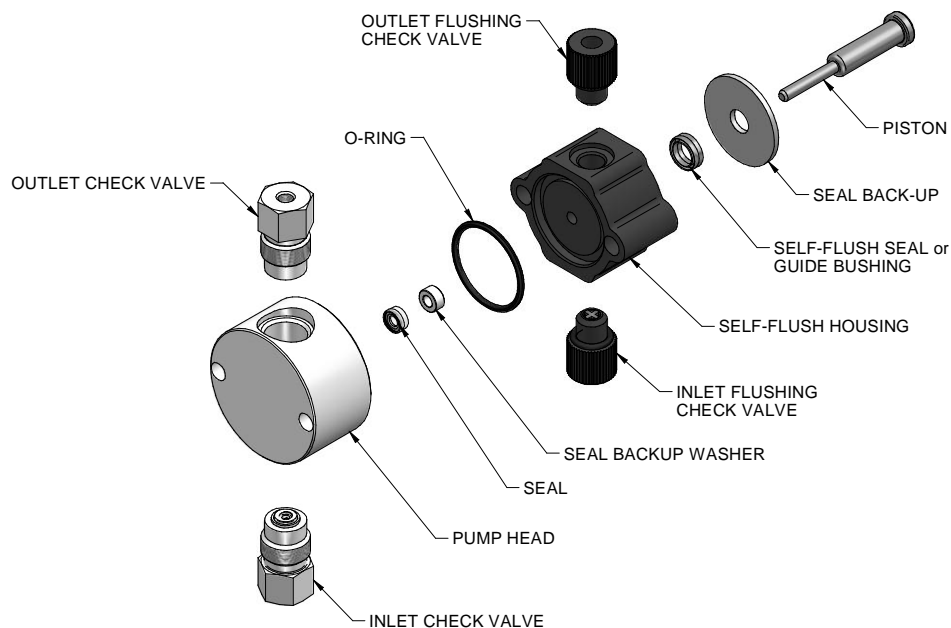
Stainless Steel Self-Flushing Pump Head Assembly
